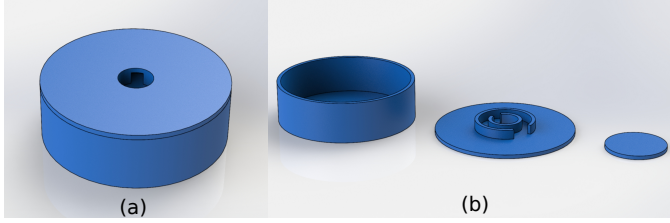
Split-ring neck design: (a) Assembly, (b) Exploded view
